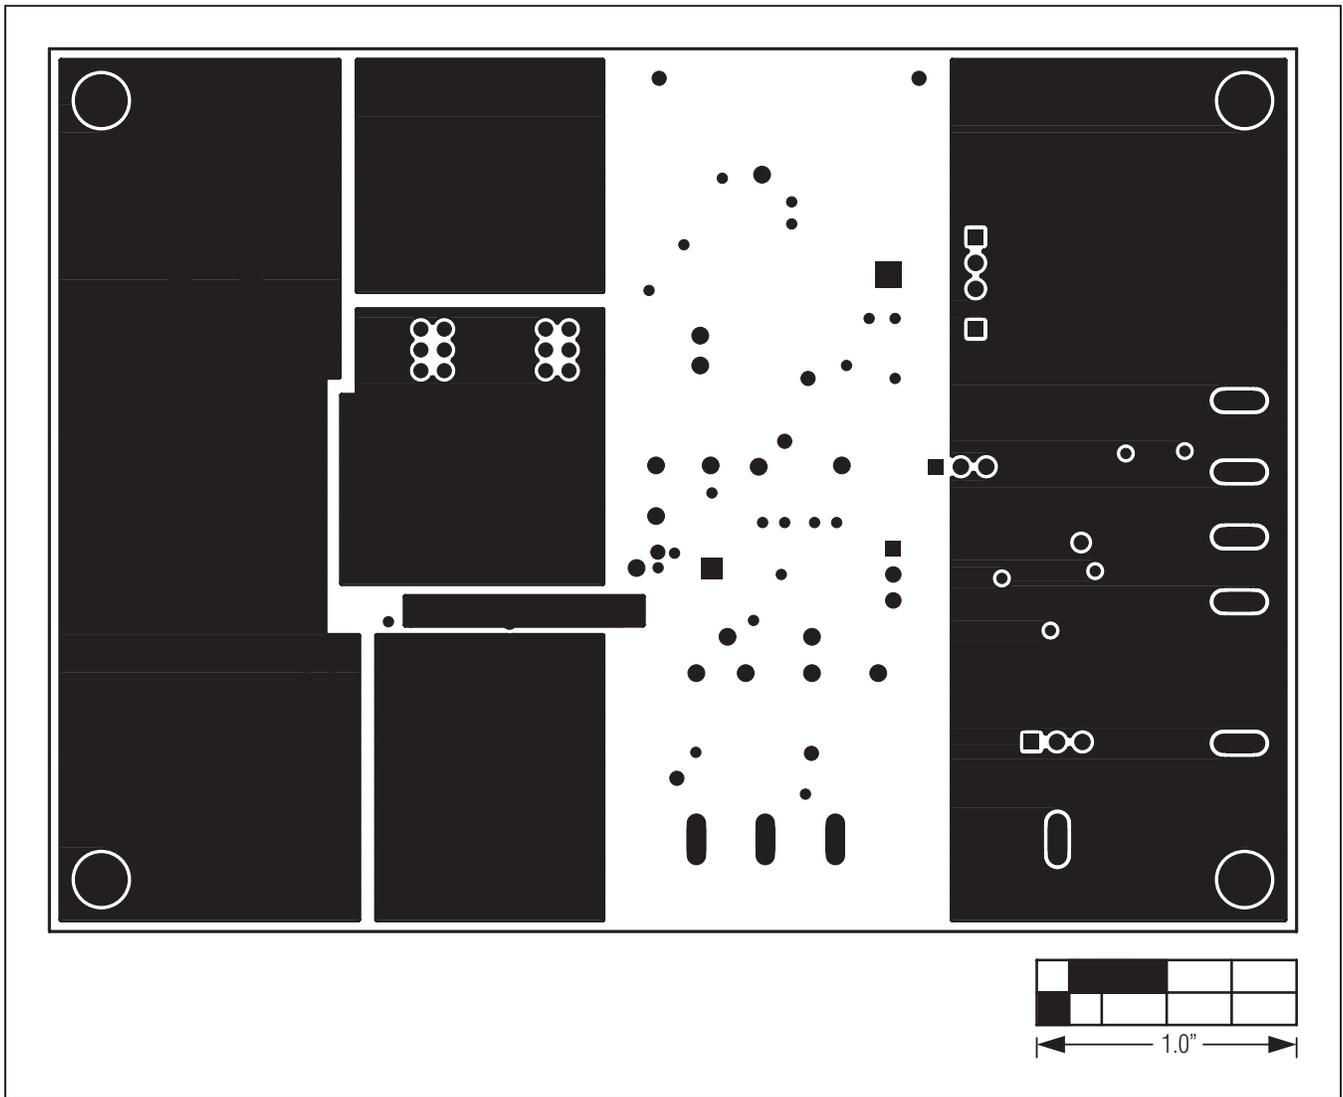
MAX5977A EV Kit PCB Layout—Inner Layer 3
